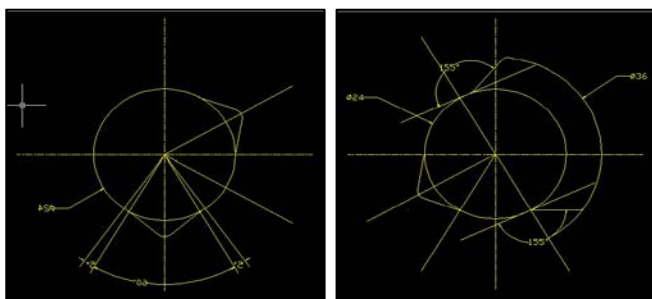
Cam Profile for Second Cylinder Inlet Valve and: Cam Profile for Second Cylinder Exhaust Valve
